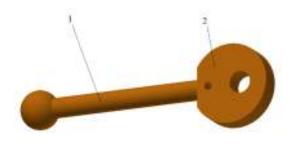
Eccentric cam with handle: 1 - 1 lever; 2 - 1 cam with eccentric.
